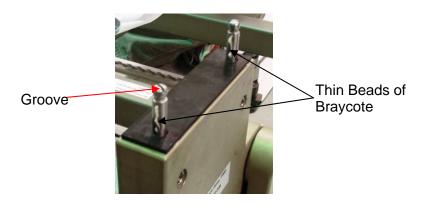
Thin Beads of Braycote on Shafts of Locating Pins.
